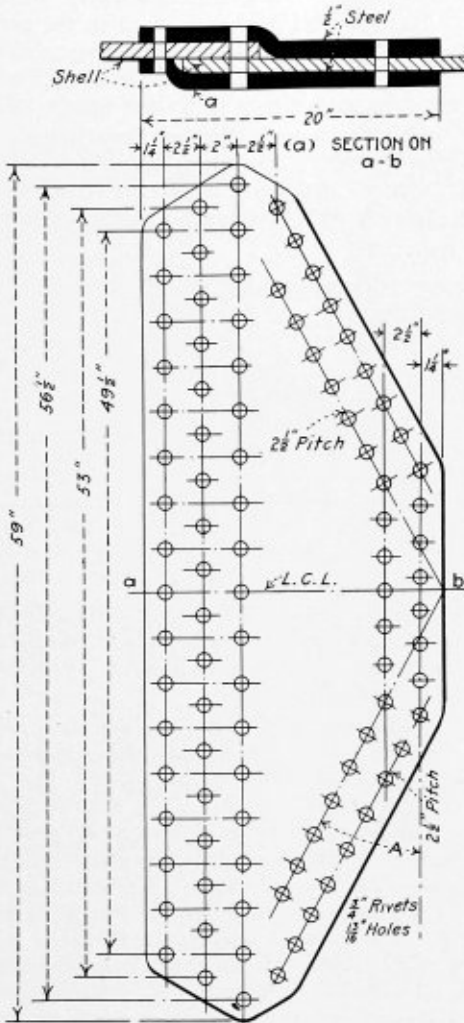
Boiler Patch "B." Patch Applied to Cover Pitted and Grooved Shell
